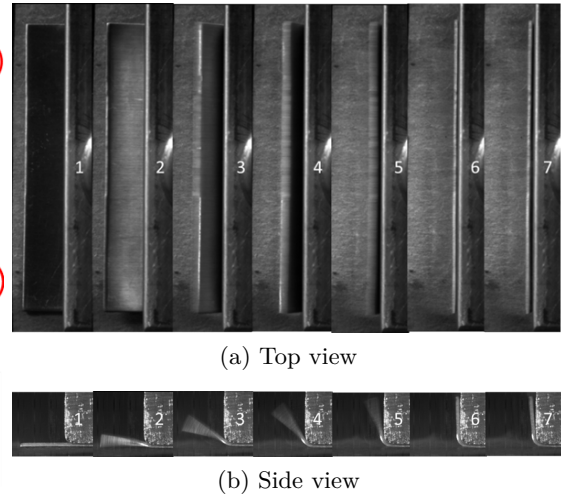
Second experiment: forming a straight flange with an optimized inductor, recorded with high speed camera (45000 frames per seconds). Extracted from [159].
